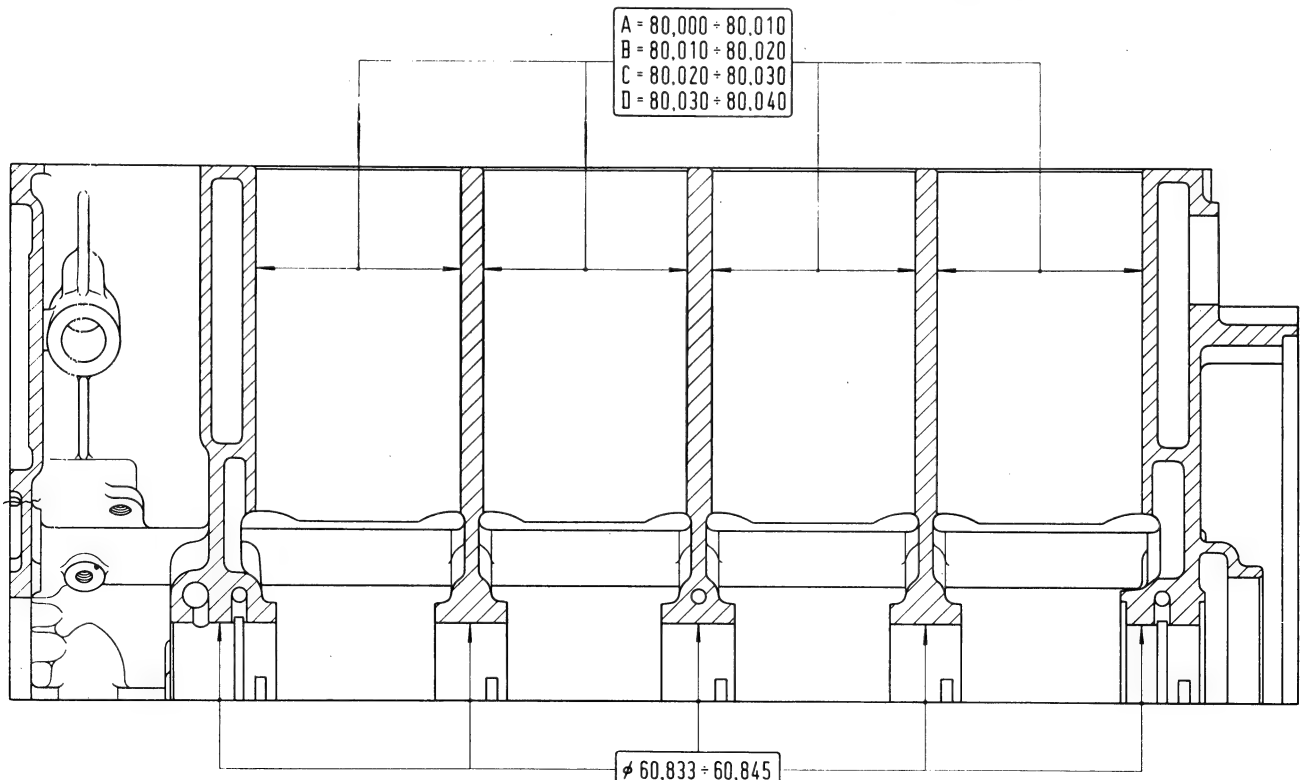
Critical dimensions of 118 B.000 engine crankcase (in mm): diametrical sizes of cylinder bore grades and of five main bearing saddles.
